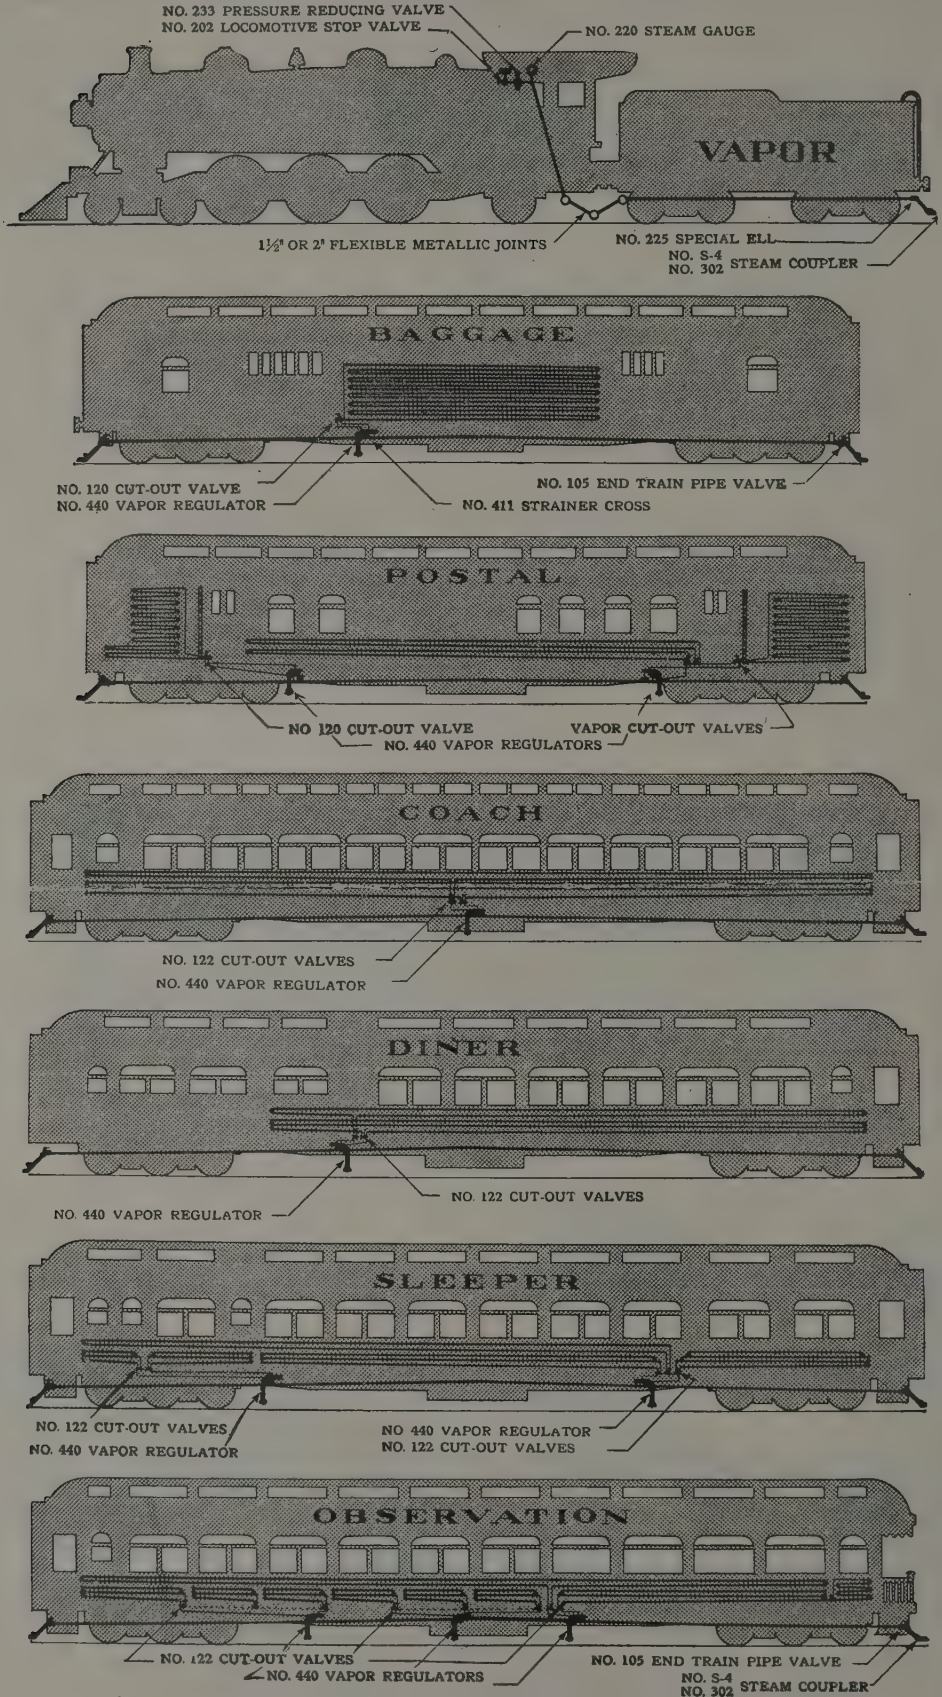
Complete Passenger Train Equipped with Vapor Heating System.
